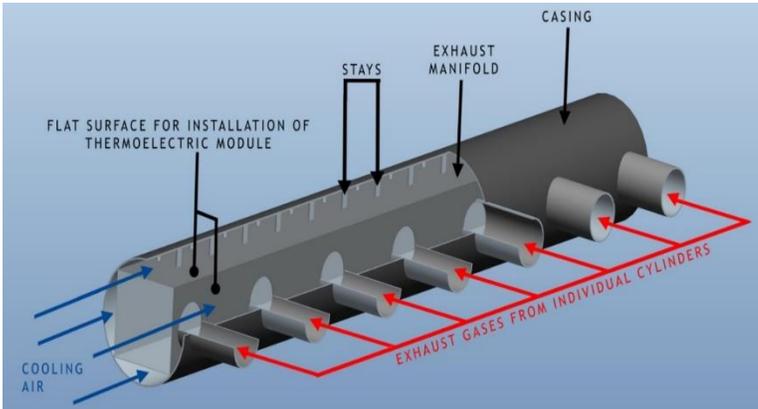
Proposed design of exhaust manifold (square cross section) with TEG modules on its flat outer surfaces.
